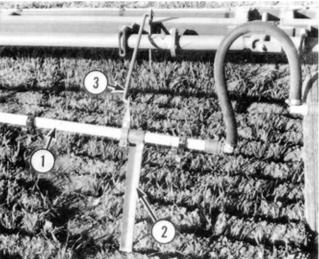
Failed Spray Boom Support: (1) Spray Boom, (2) Boom Support, (3) Parallel Linkage Bar.
